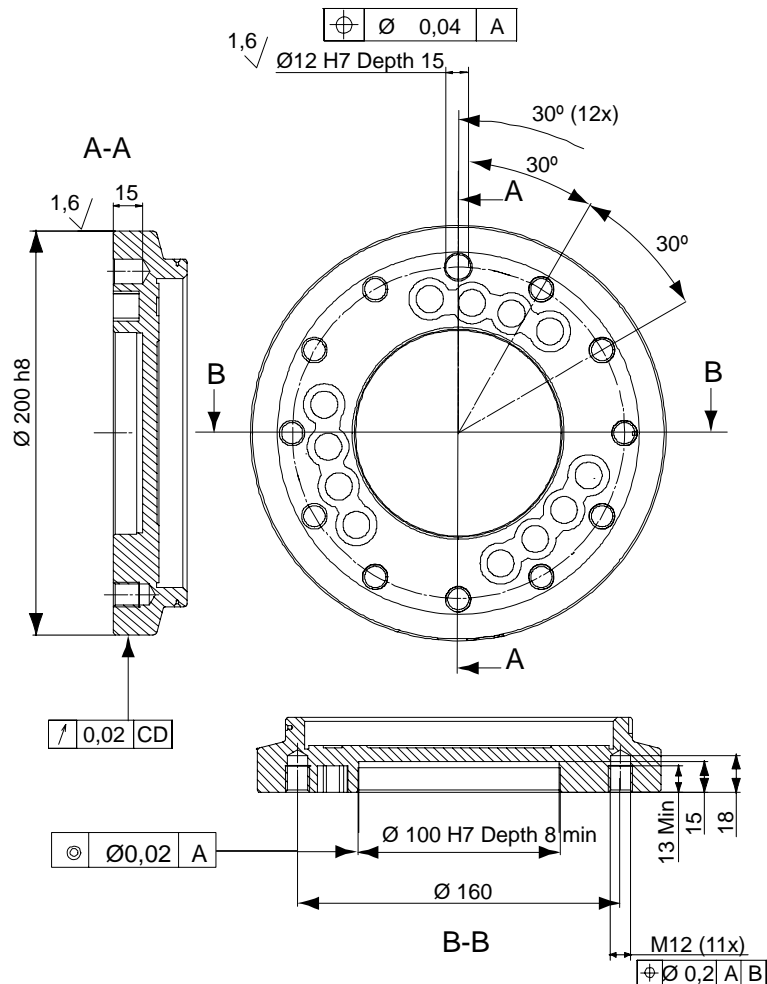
Robot tool flange SS-EN ISO 9409-1;2004 (dimensions in mm).
